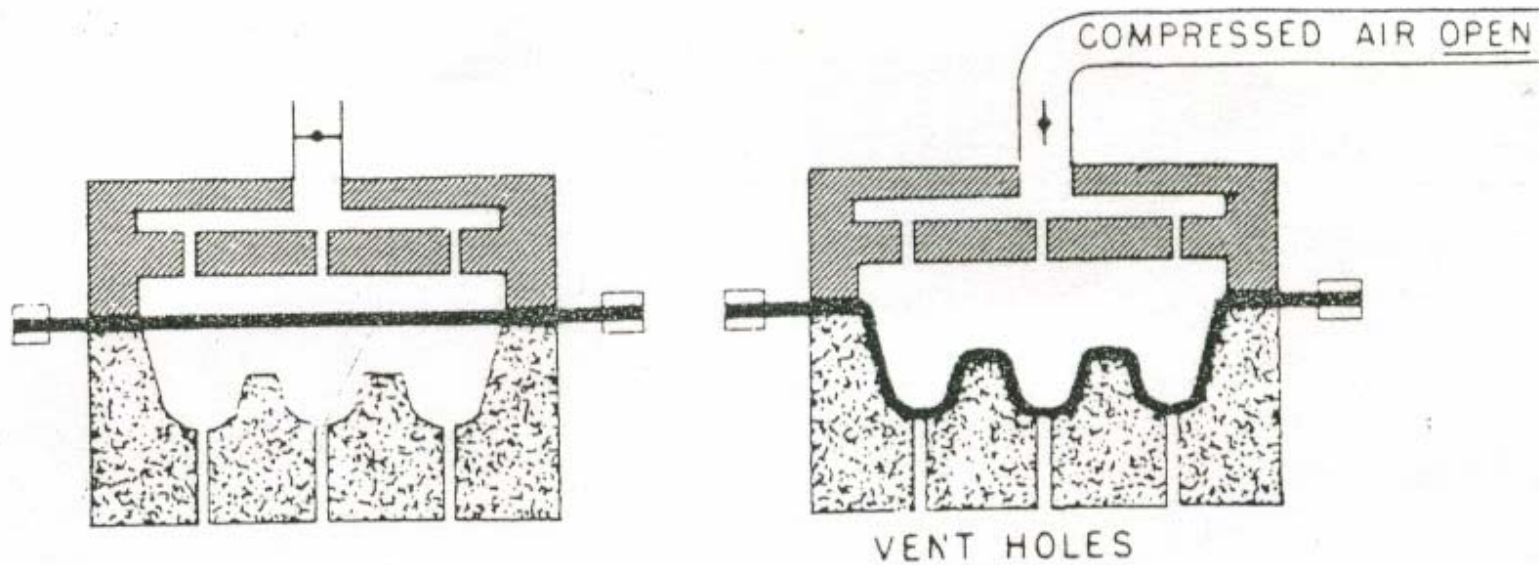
Pressure forming into female cavity. Heated sheet is clamped over cavity, and compressed air pressure forces the sheet into the mold. (Courtesy Dow)
